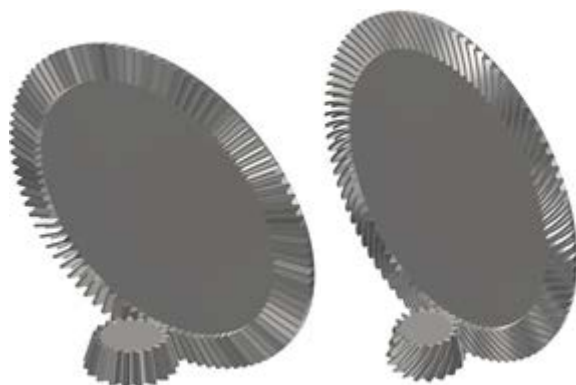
Model of bevel gear, constructed by the help of Bevel Gears Component Generator in "Autodesk Inventor" environment ($u = 5$): a – straight-toothed gearing; b – gearing with circular teeth
